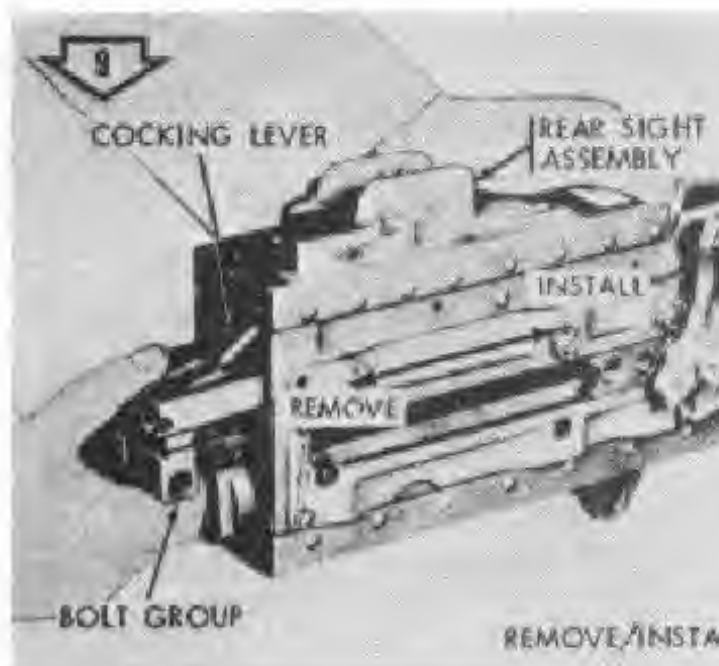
Disassembly/assembly of Caliber .50 Machine Gun, M2. (5 of 20)
